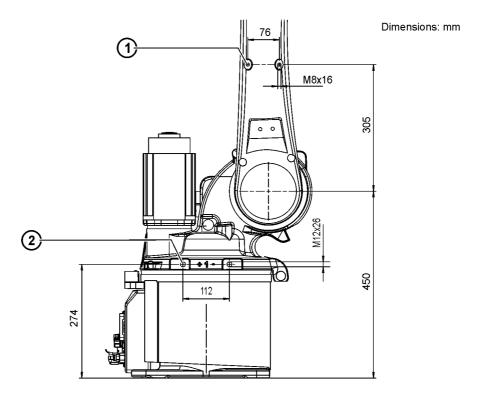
Fastening the supplementary load, link arm/rotating column
